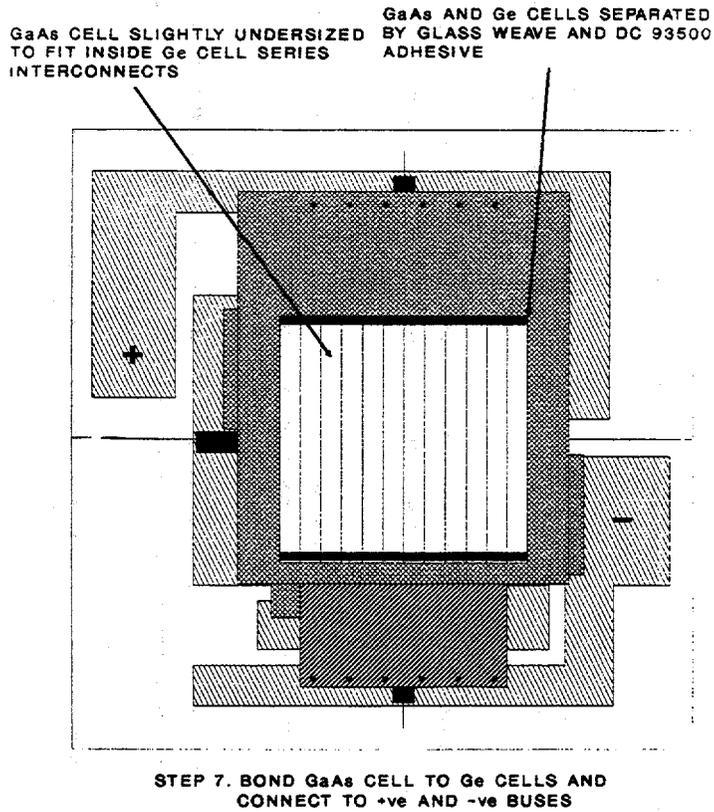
COMPLETED GaAs/Ge CONCENTRATOR ASSEMBLY
